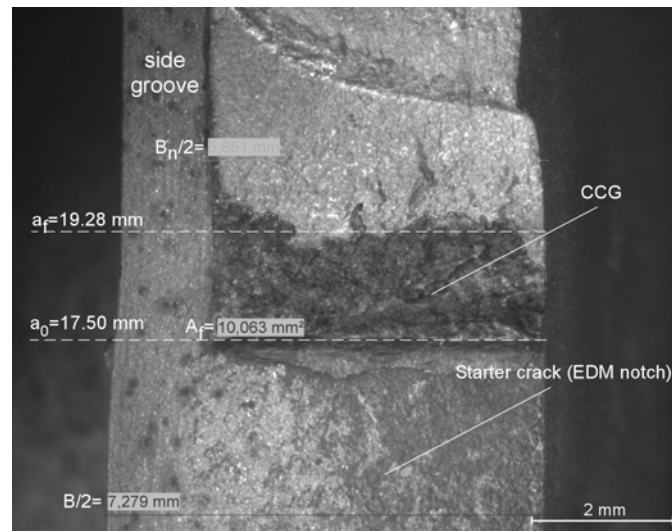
Determination of crack length on fracture surface of a sectioned specimen half of a C(T) specimen.
